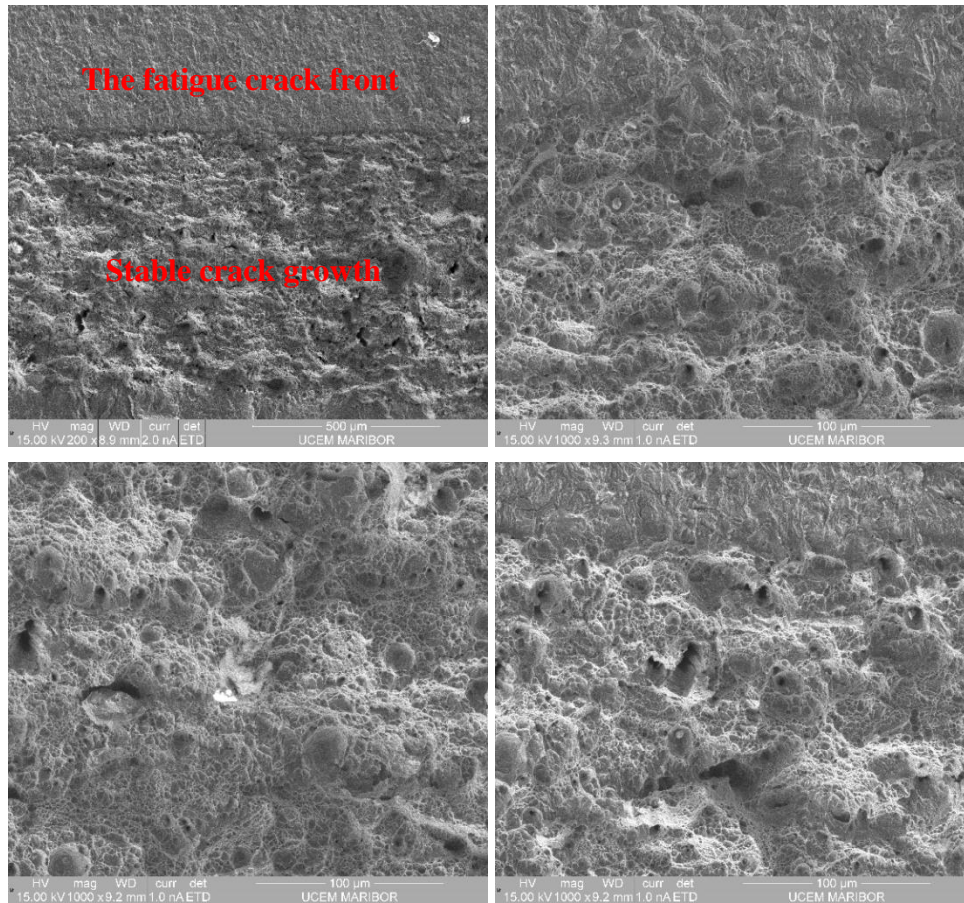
26 Fractographs of the crack surface (Surface 2 of the FG1 specimen)
